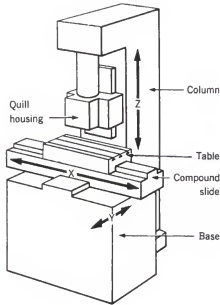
Schematic of three-axis stacked-slide SLM machine tool [2].
